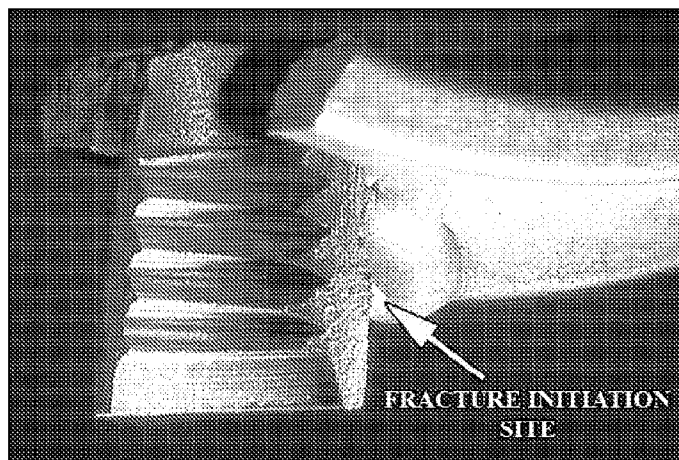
The fracture surface of the failed trigger showing the location of the fracture initiation.
